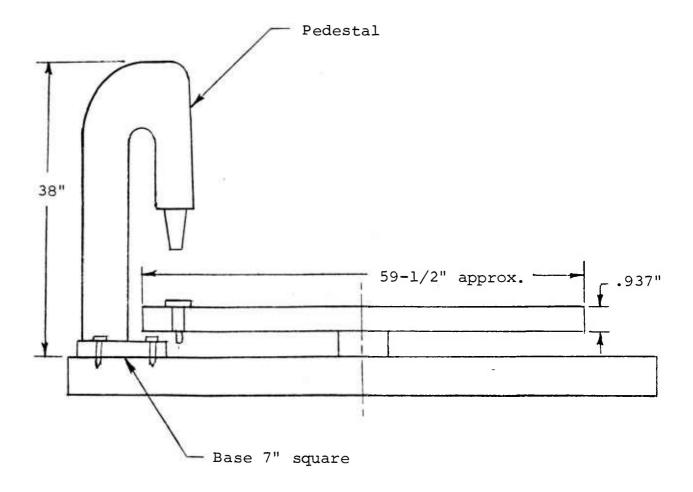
Side view of ultrasonic welder frame installed on Iowa Loader (not to scale).
